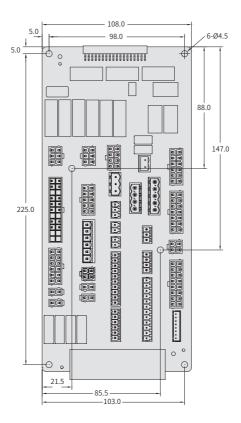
Outline and dimensions of the MCTC-KCB-N1 (unit: mm)
